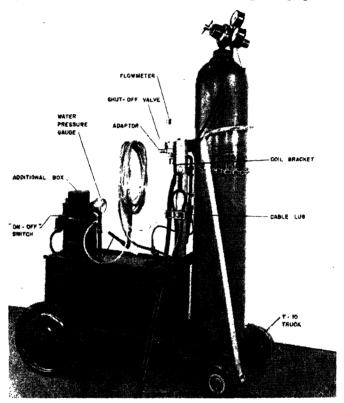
A portable inert gas arc welding station. This unit is complete as shown except the welding current source and a 100-Volt A.C. supply. It uses a water tank and circulating pump to improve portability
